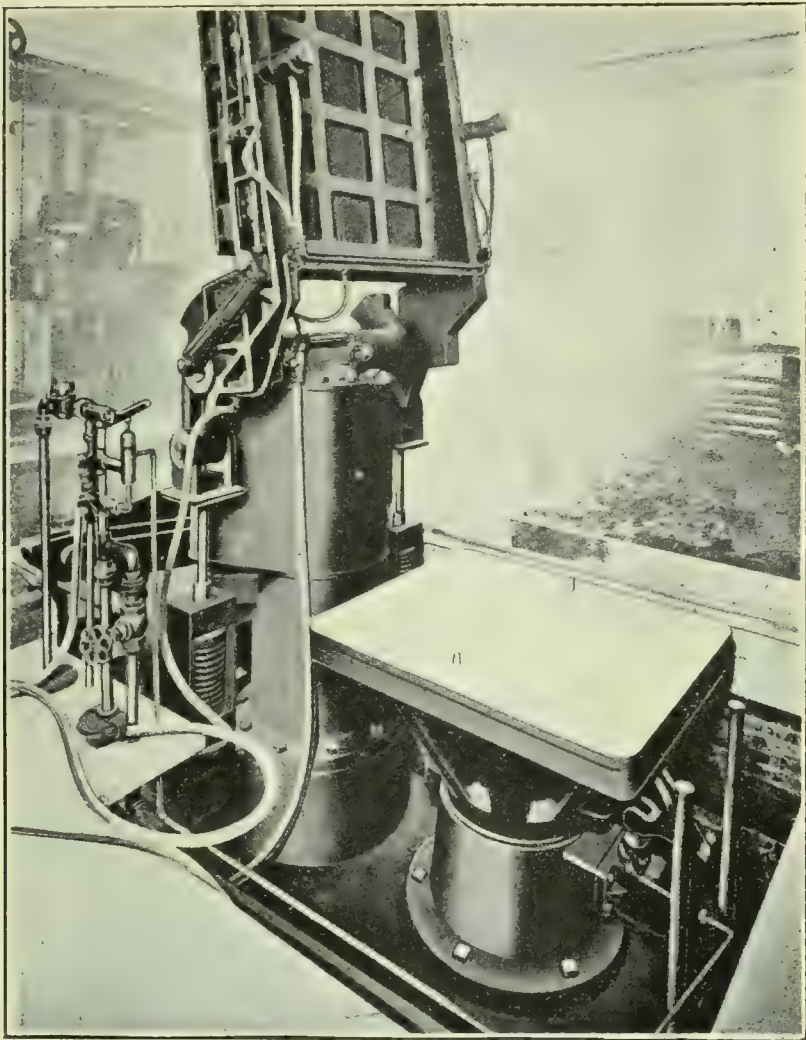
POWER ROLL-OVER MACHINE IN COMBINATION WITH JARRING MACHINE
